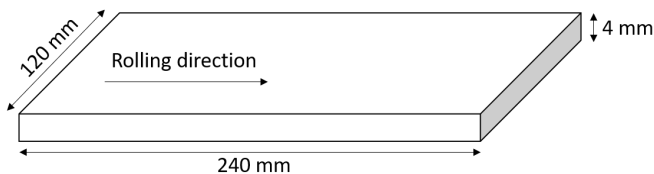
Schematic illustration of one of the base material plates used in the HYB joining trial, including both the plate dimensions and welding/rolling direction. Note that, the illustration is representative for both base material plates used in the joining trial.
